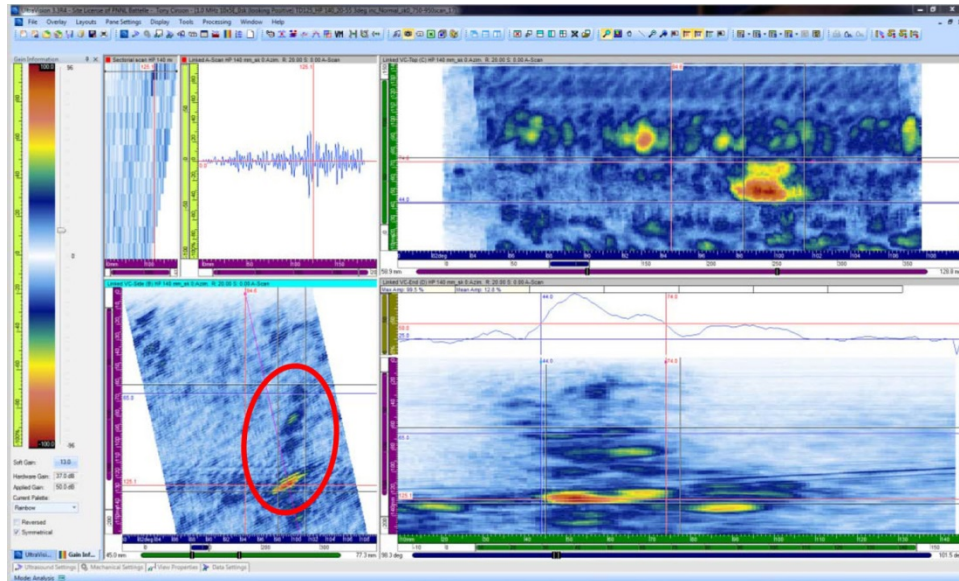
CW, Skew 0, Axial Flaw 2, Circled in Red
